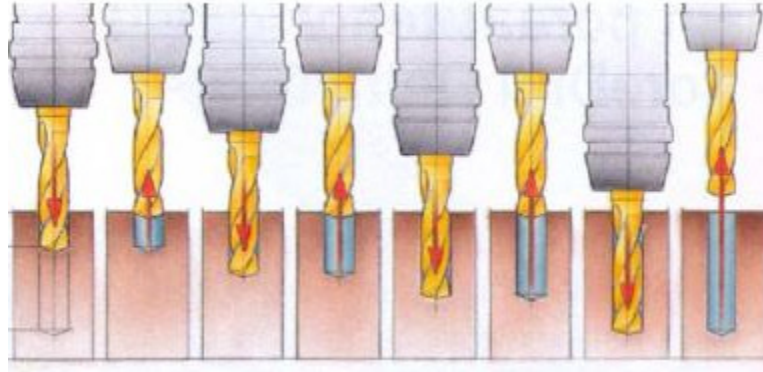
Deep hole drilling cycle by traditional drilling tools. (DS, Deep Hole Drilling, 2008)
